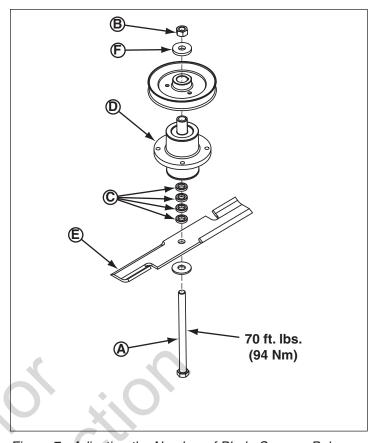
Adjusting the Number of Blade Spacers Below Each Spindle
